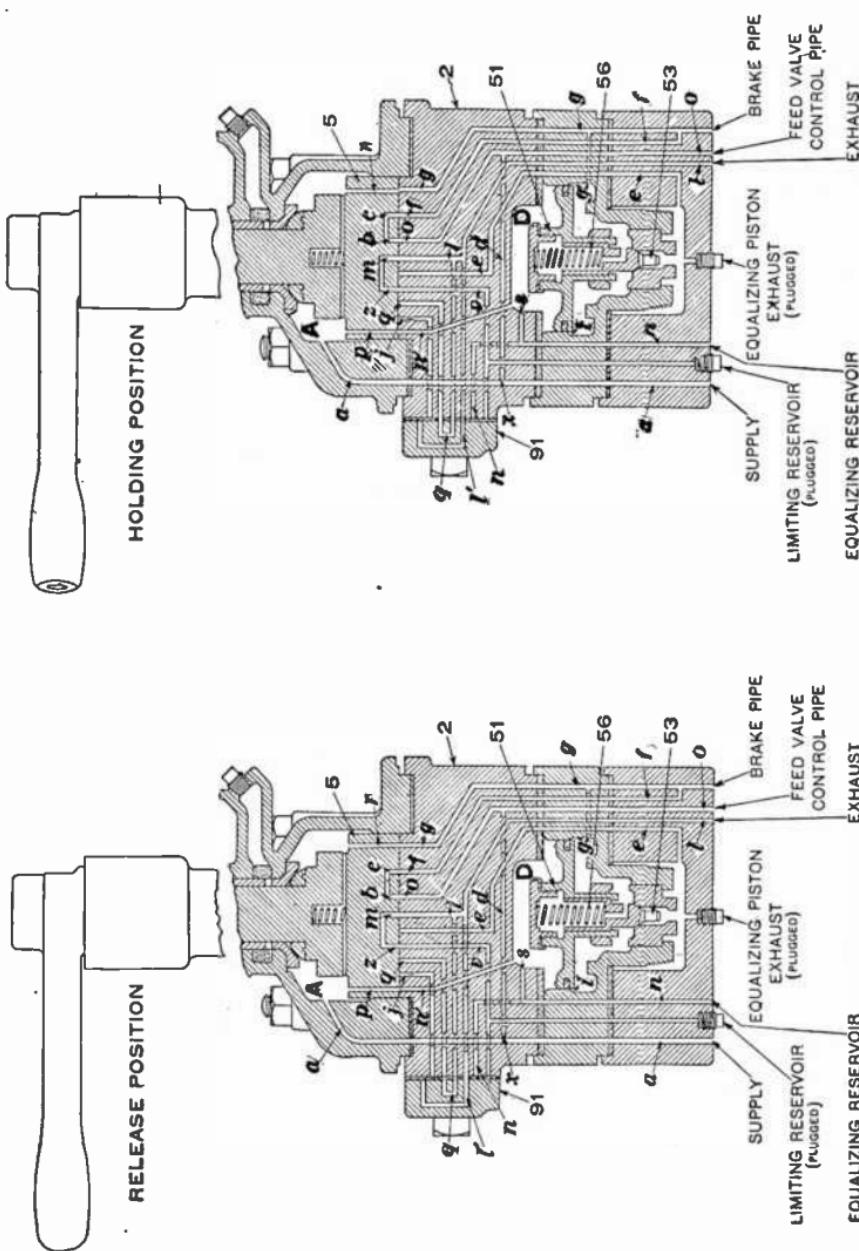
,340.—Westinghouse electro-pneumatic brake valve 1. Release position.
